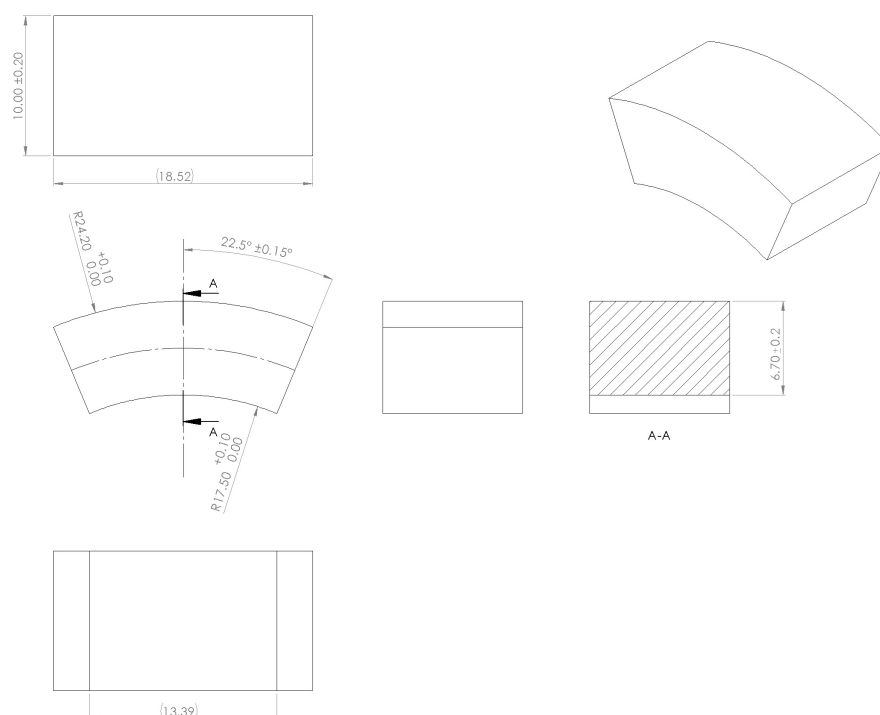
Geometry of the machined PEEK specimen used for ring-on-block testing.
